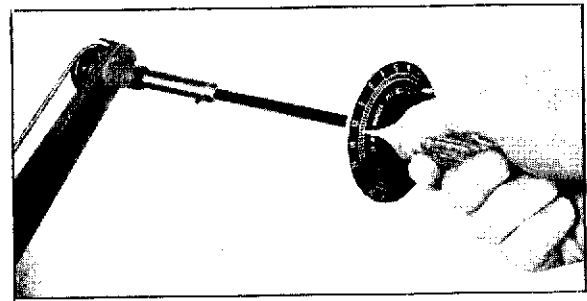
REVERSE DRIVE TORQUE MEASUREMENT.
